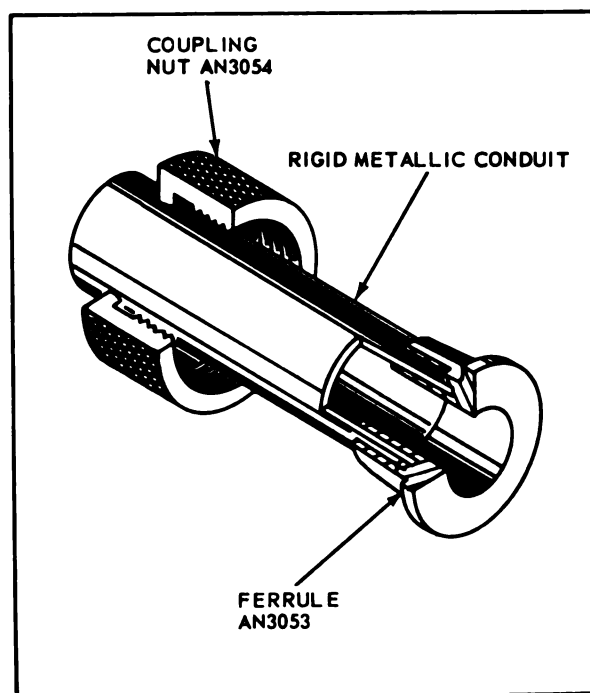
Installing Nut and Ferrule on Rigid Metallic Conduit
